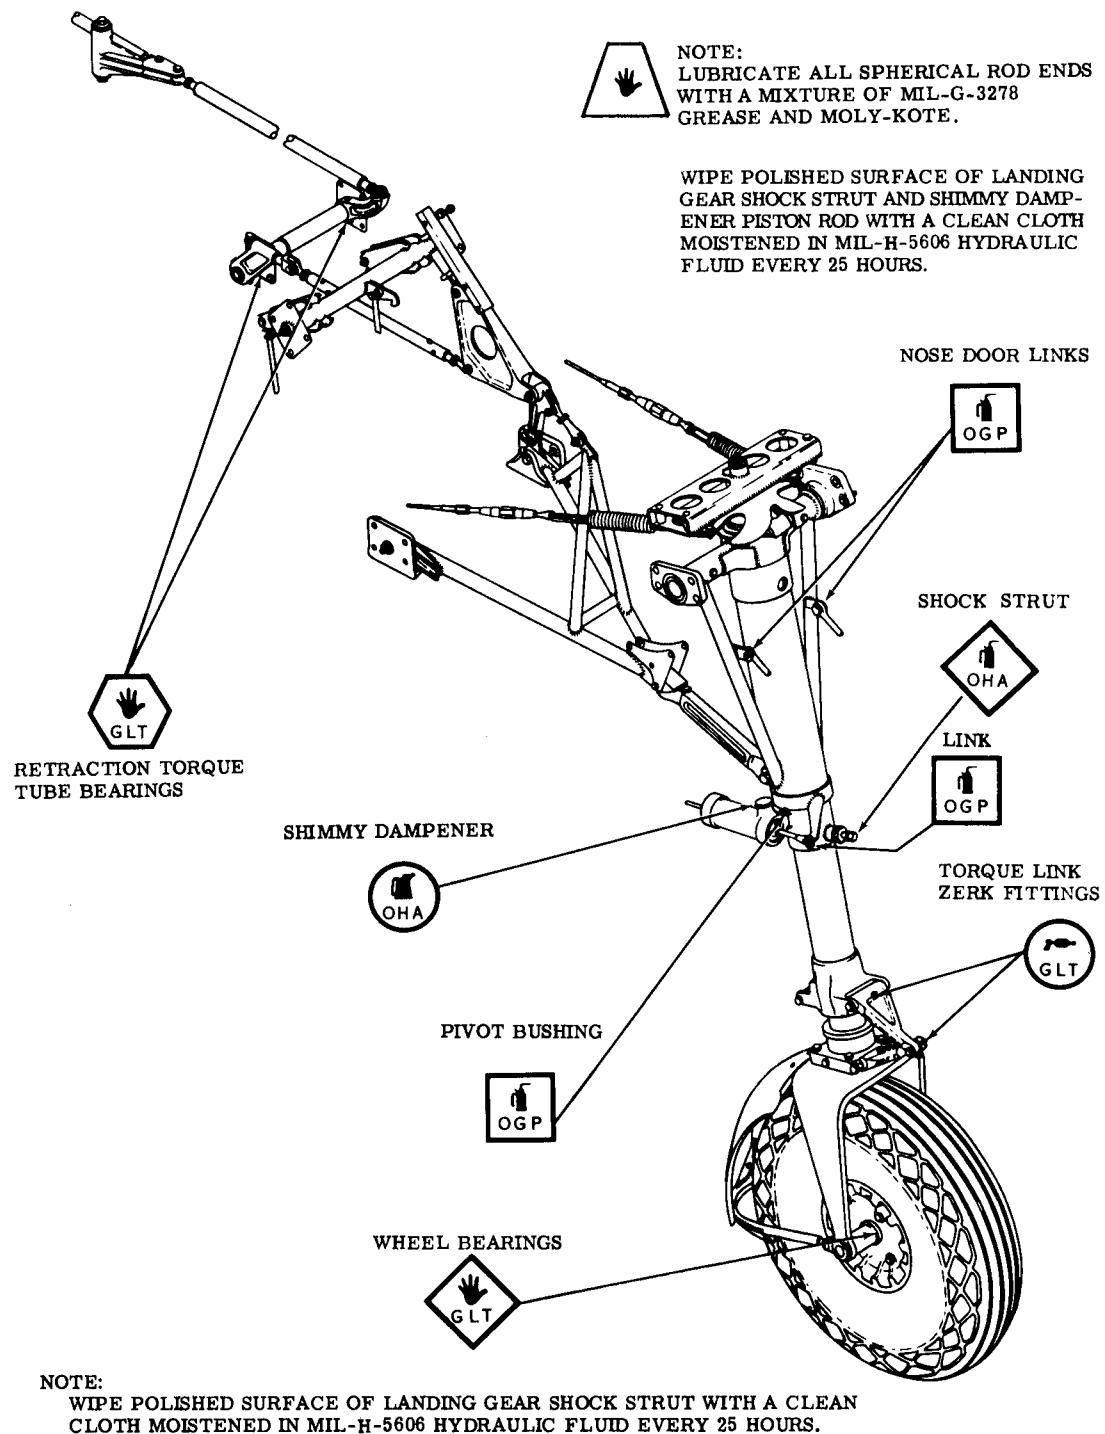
Lubrication Diagram (Sheet 8 of 13)
